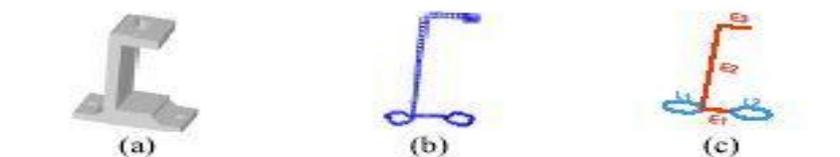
(a) CAD model, (b) Skeleton, and (c) Skeletal graph for a clamp containing 82 faces
